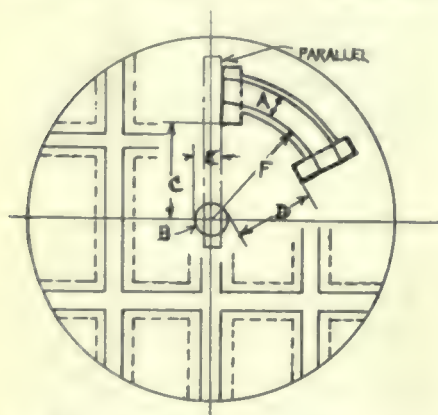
METHOD OF LOCATING WORK RADIALLY FOR MACHINING ON BORING MILL.
